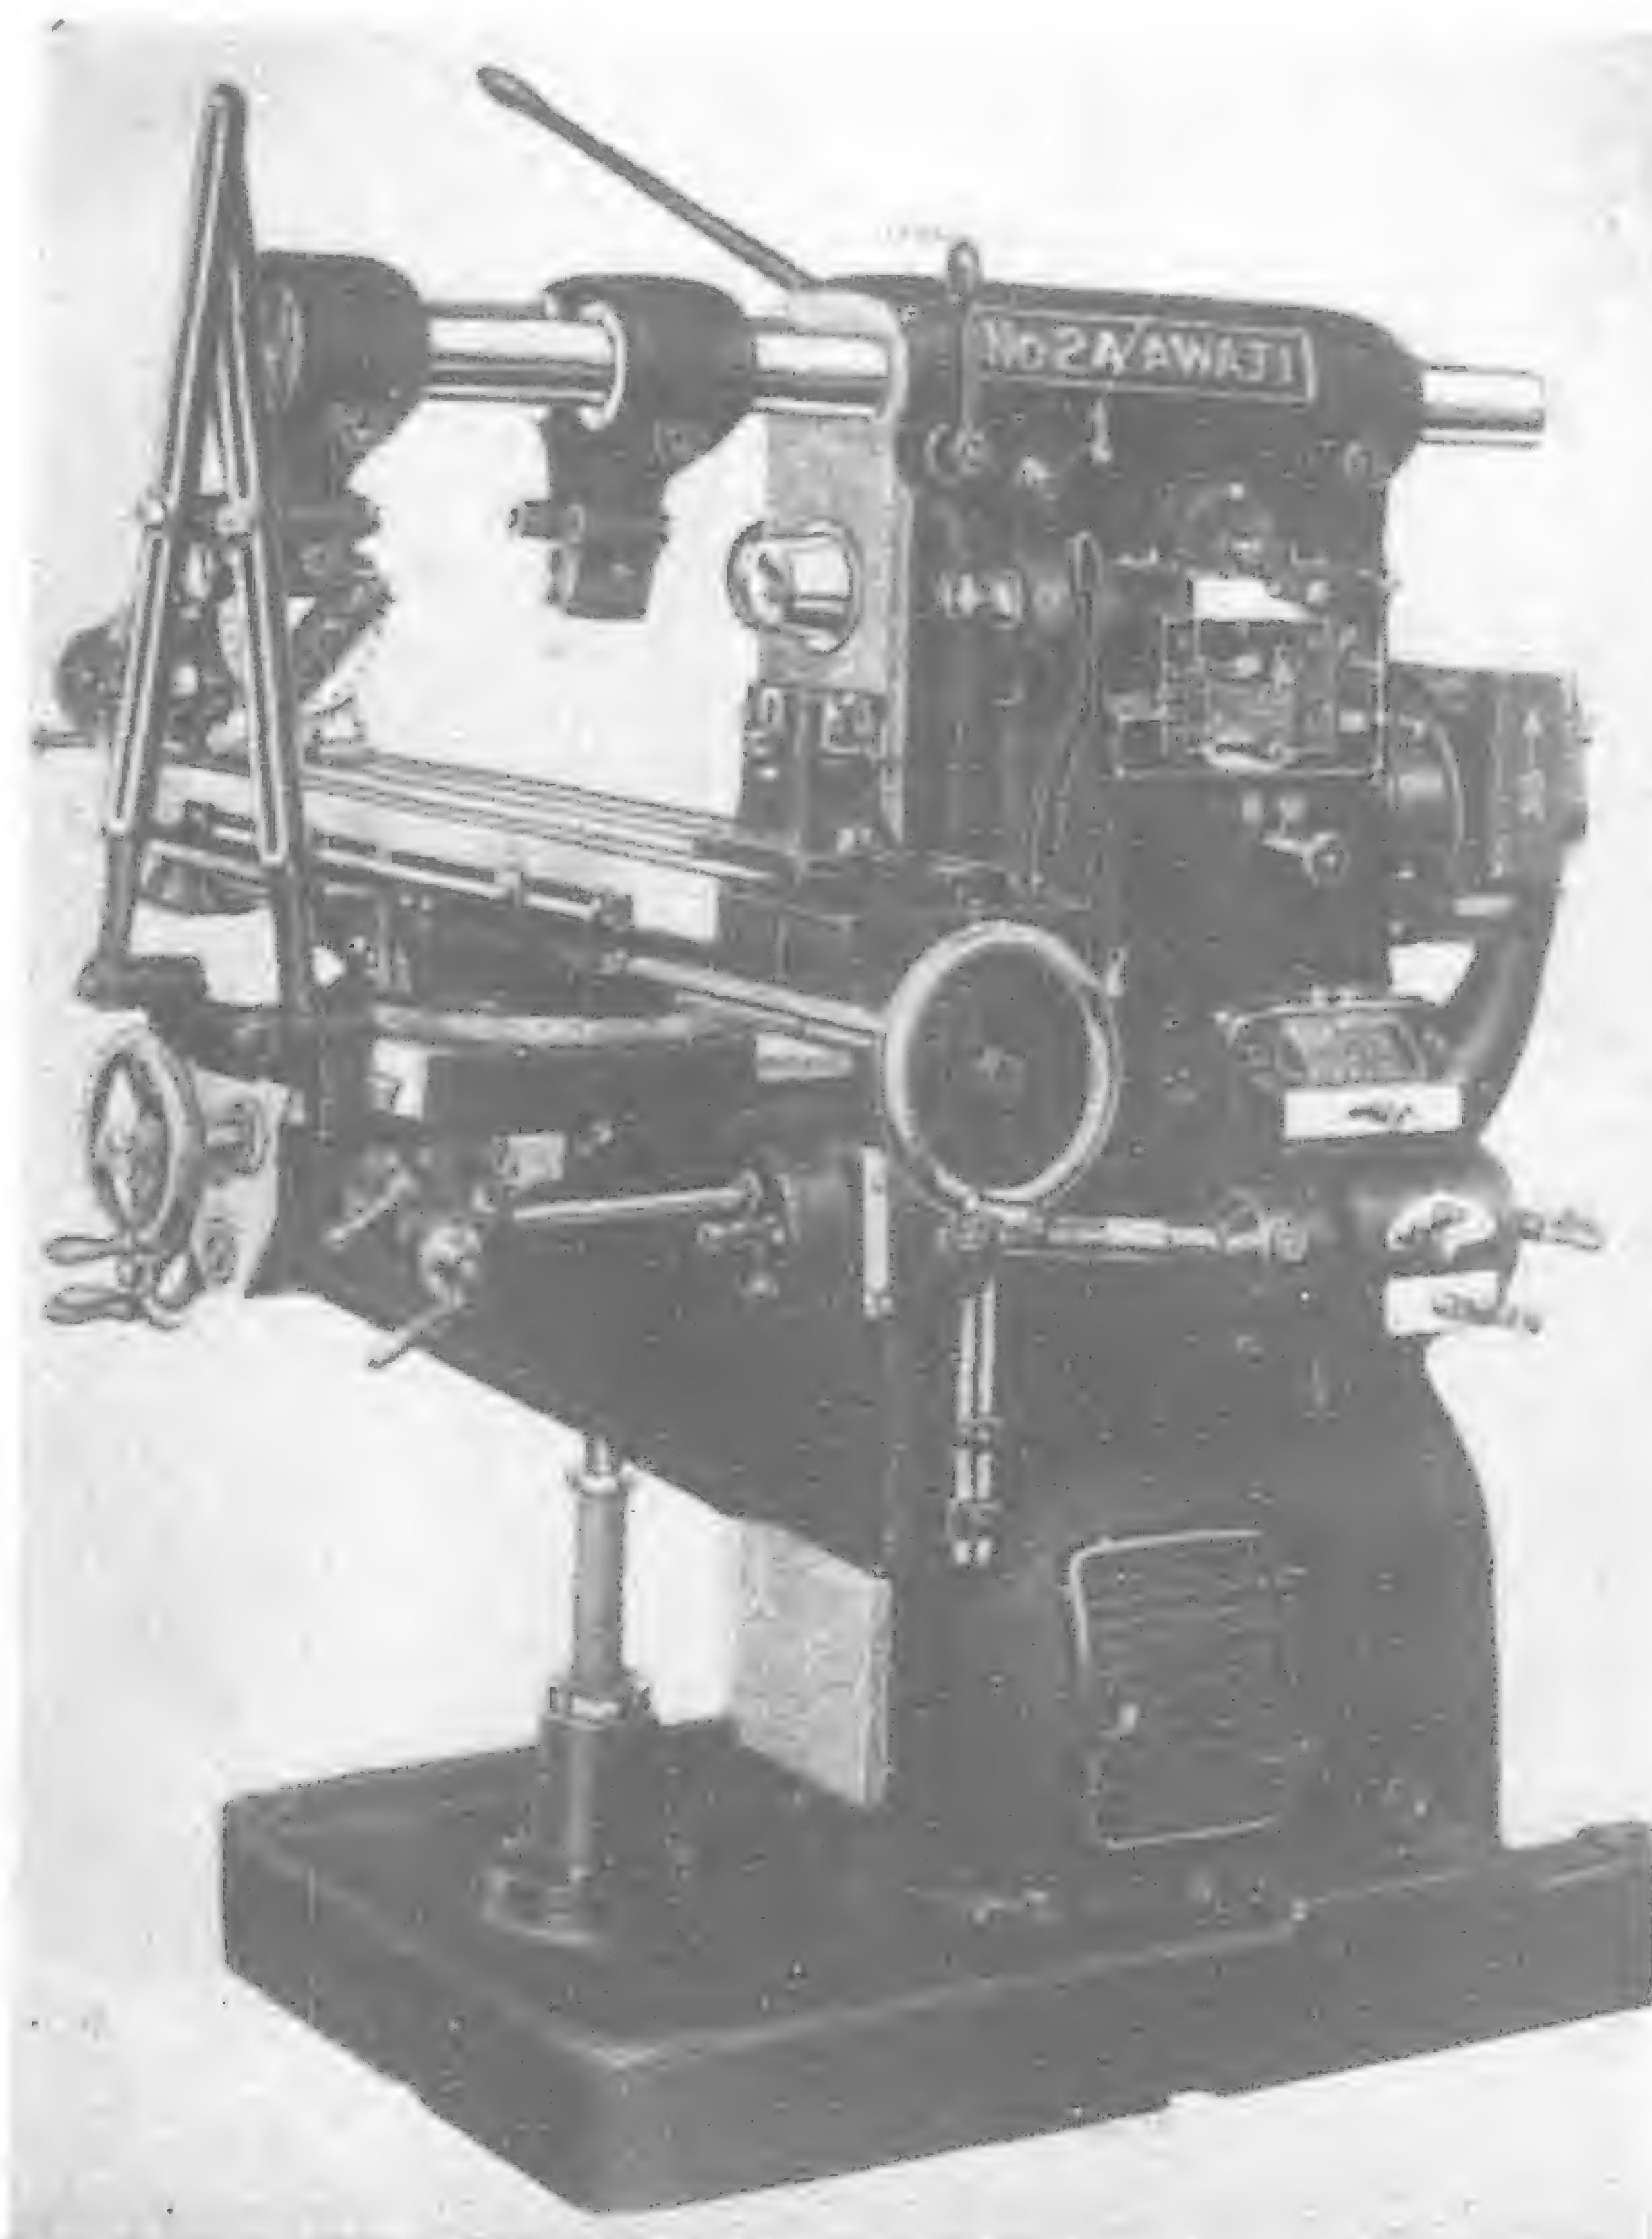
Universal Milling Machine. Spindle and gears are made of Nickel-Chromium Steel. Manufactured by Awaji Iron Works, Tokyo
